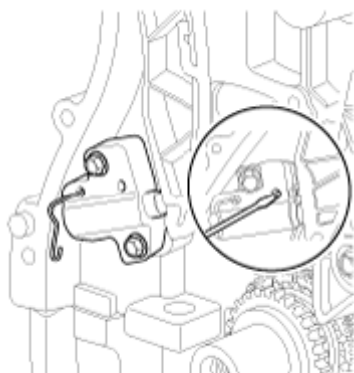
Installing Set Pin After Compressing RH Timing Chain Tensioner
